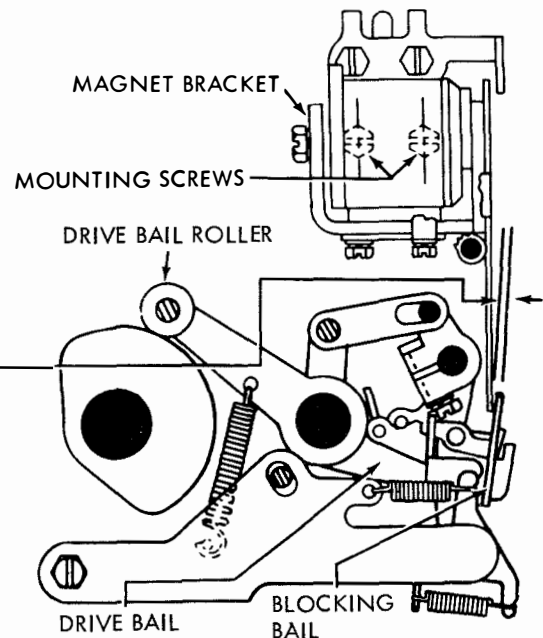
Remote Control Tape Feed-Out Mechanism (Not Applicable to TT-192A/UG)
